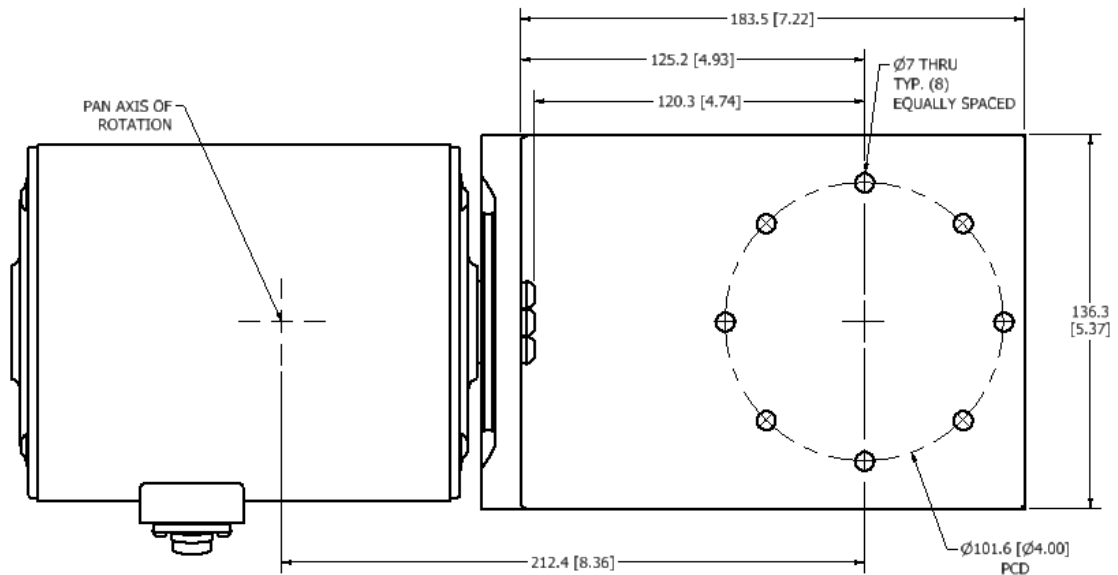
AP-30 Side Mount - Payload Mounting Pattern
